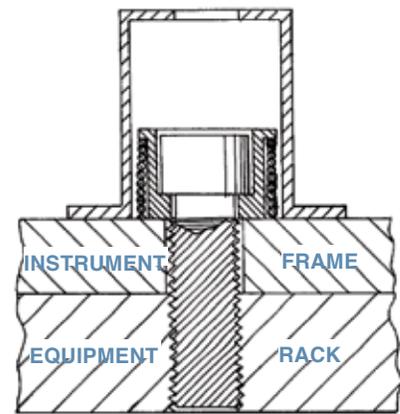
Captive screw in the engaged position, securing the bottom plate to the top plate.
